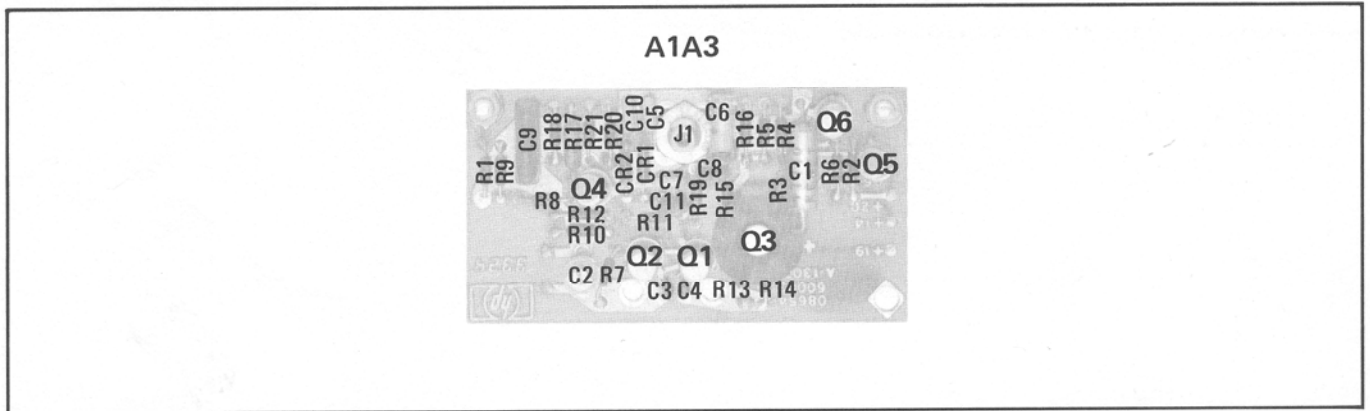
A1A3 RF Oscillator Board Assembly Component Locations
